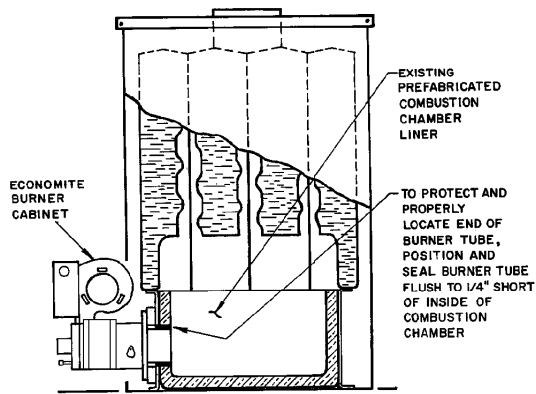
Dry Base Boiler With Combustion Chamber Liner (Furnace Construction is Similar)
